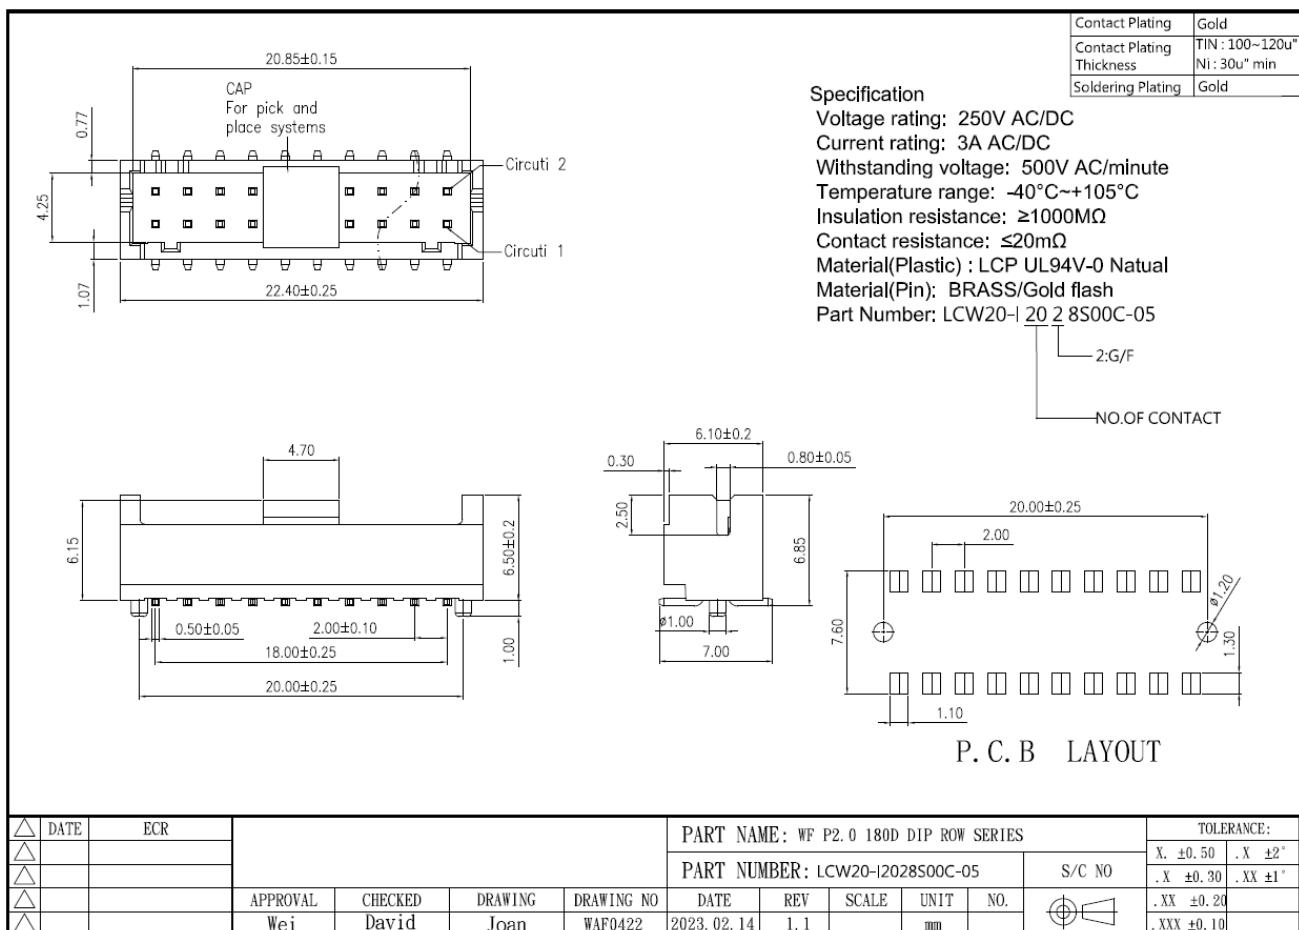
Wire to Board SMD 2*10P Connector Drawing
